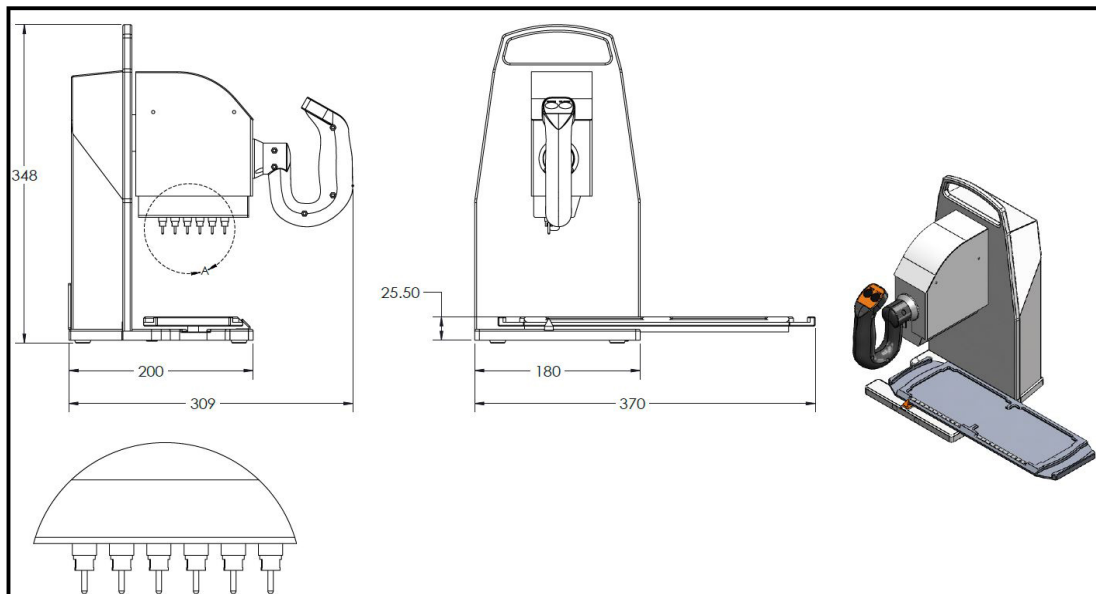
Semi-Automated Screw Cap Decapper 6 Dimensions
